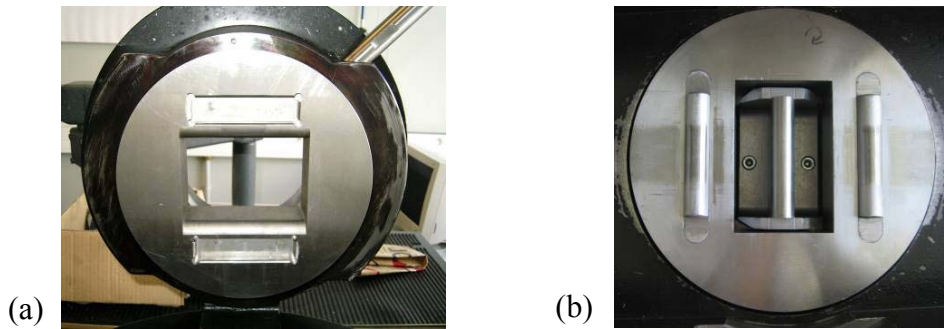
Hydraulic press. (a) die, (b) blank-holder with draw-beads and punch.
